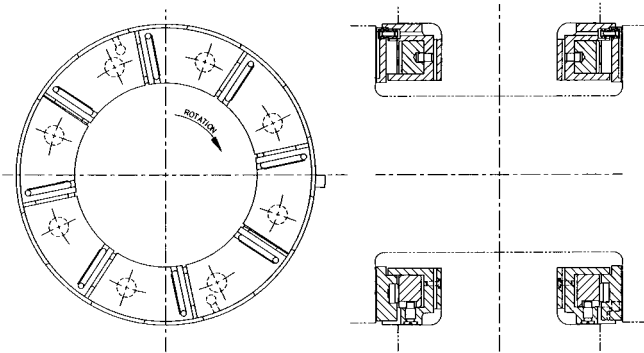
Leading Edge Groove Tilting-Pad Thrust Bearing.
